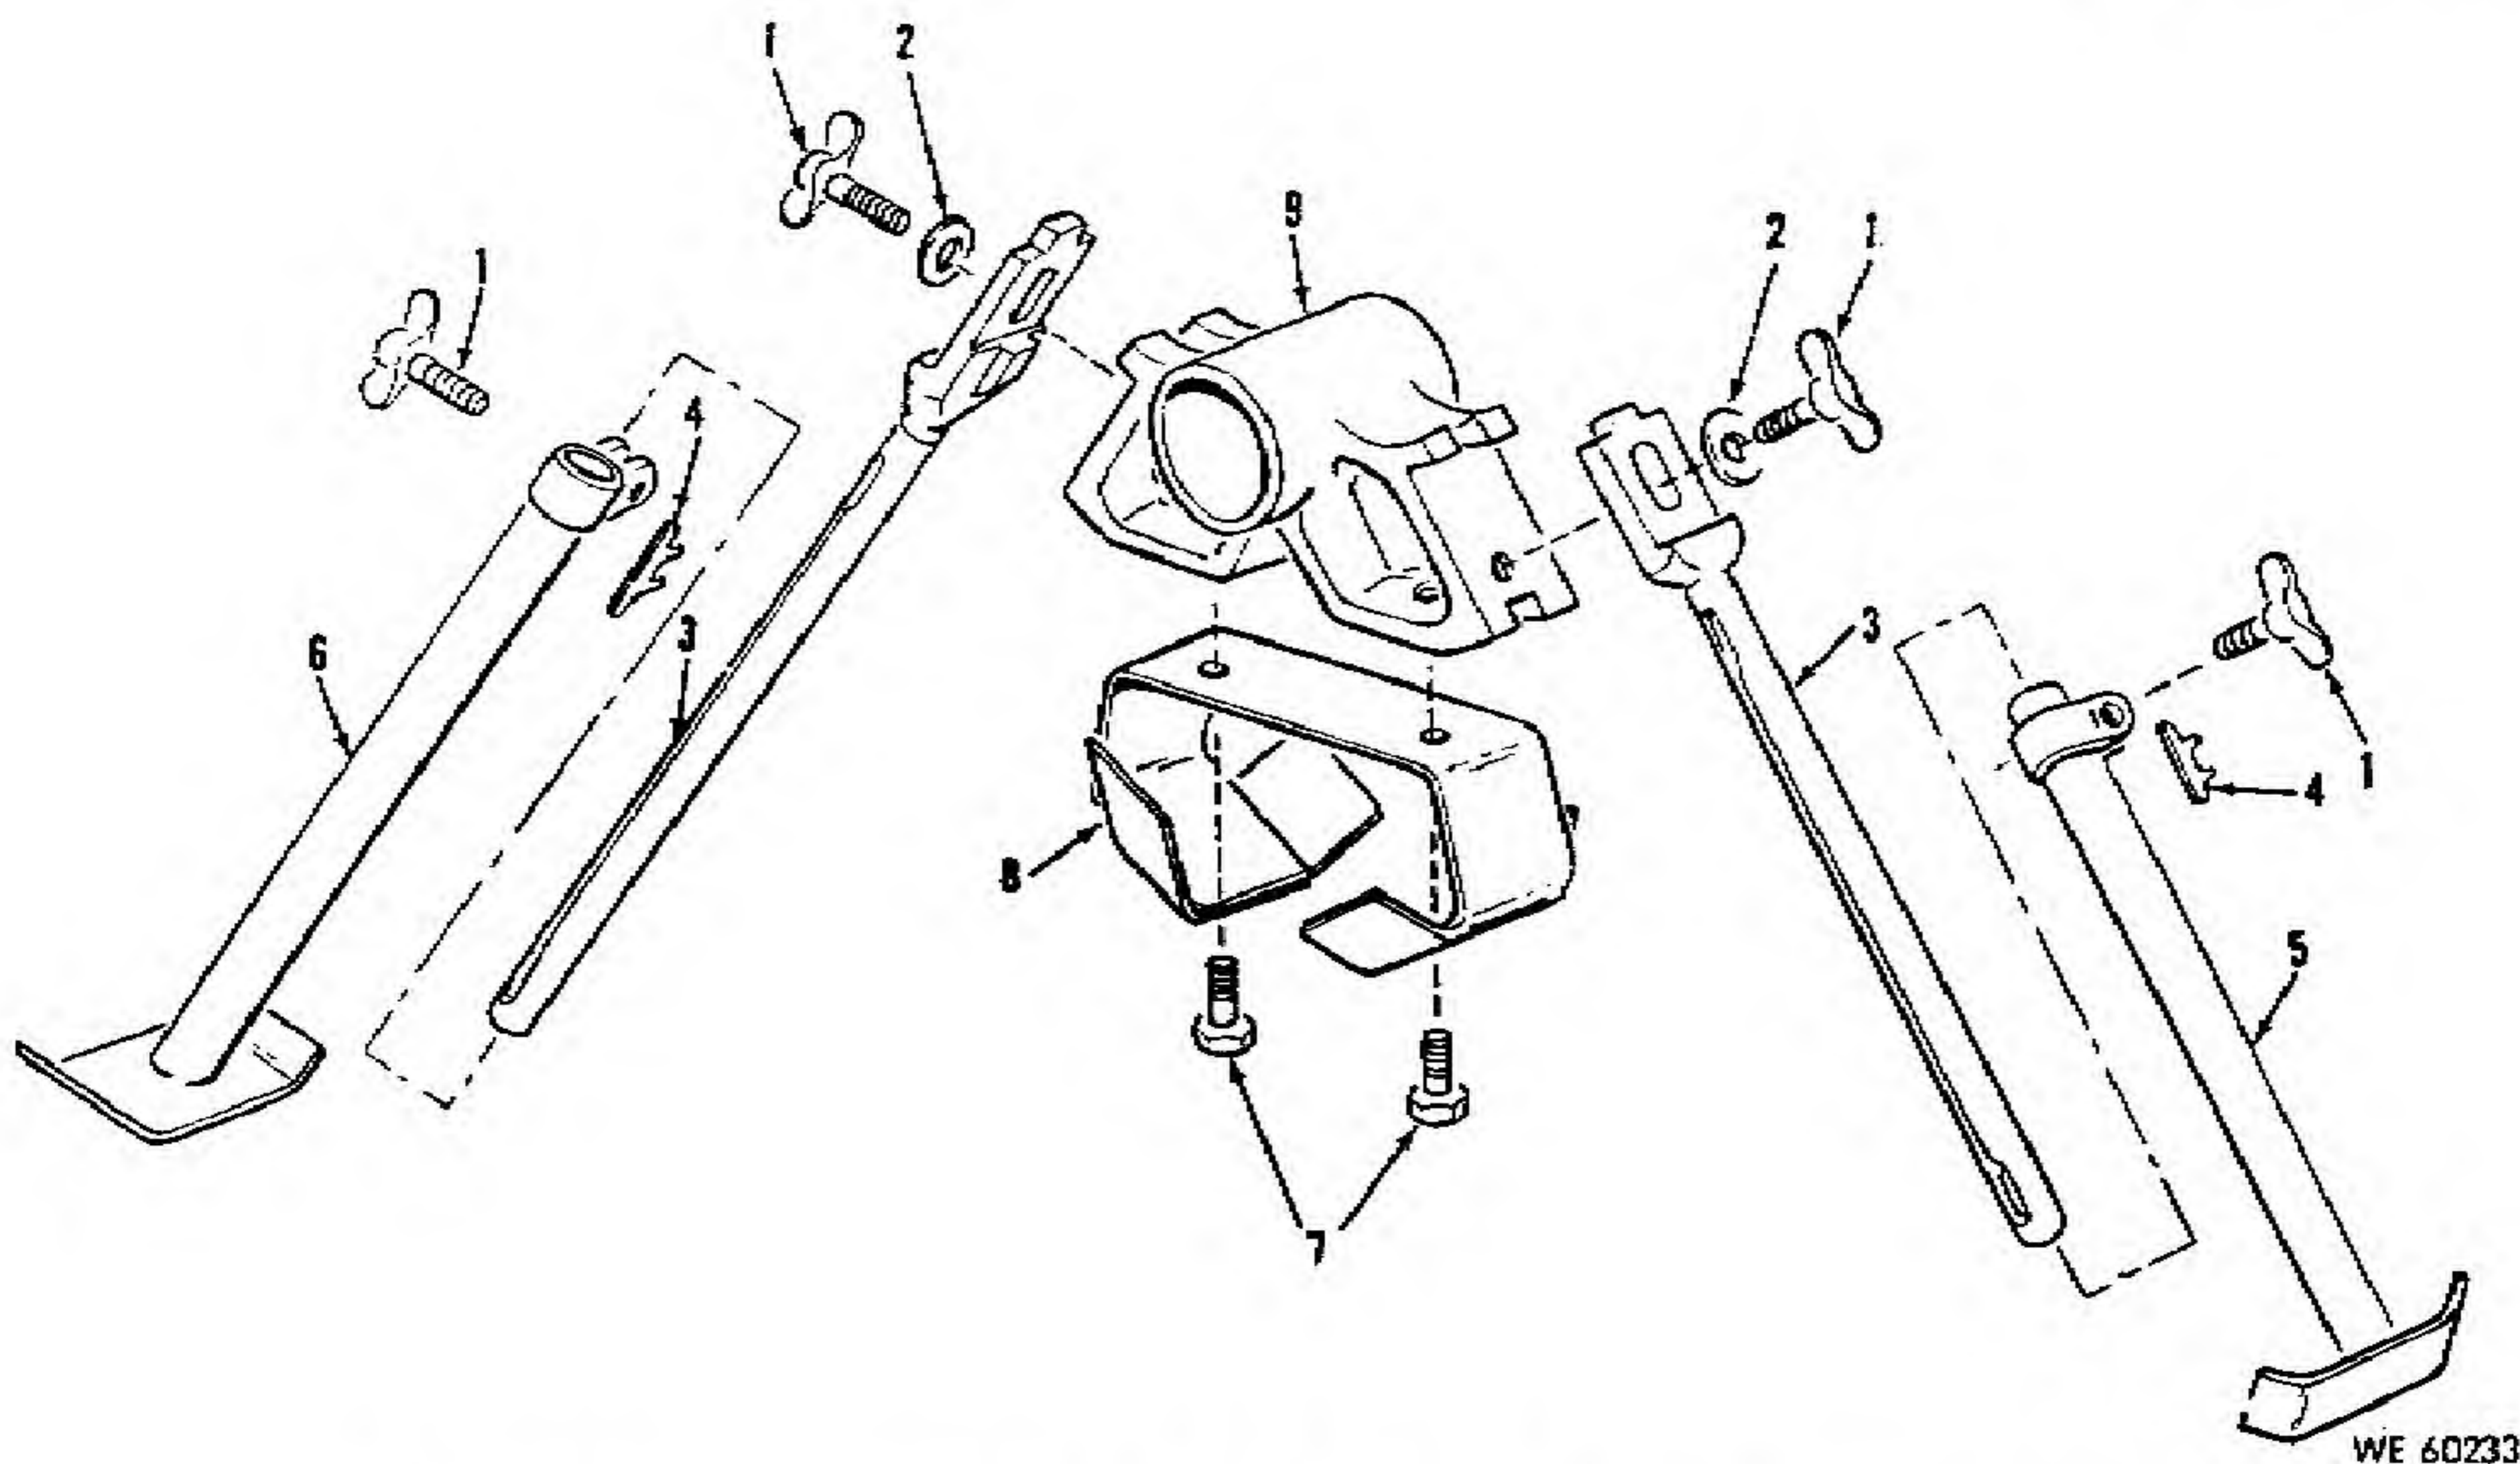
Bipod assembly—Caliber .30 Machine Gun, M1919A6 only—exploded view.
